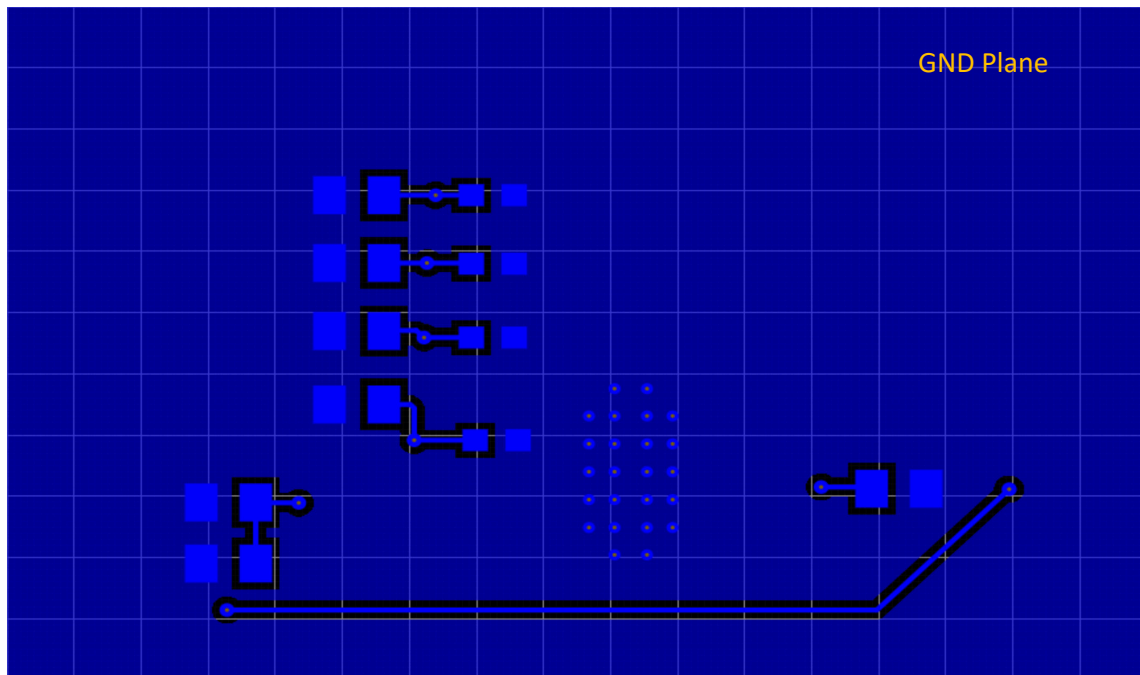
Printed Circuit Board Layout Example: Bottom Layer
